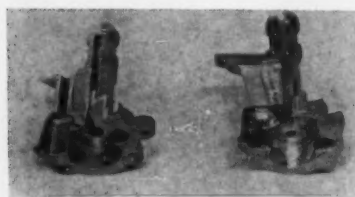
Pump housing, left, made by die casting; and by permanent mold, on the right.
